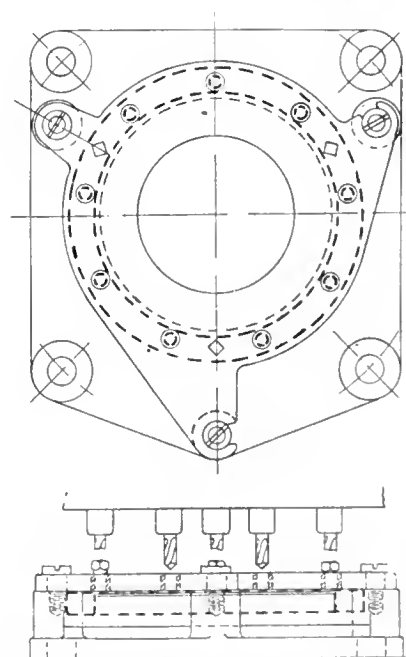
DRILLING HOLES IN RING, FIG. 13, WITH MULTIPLE SPINDLE DRILL.
